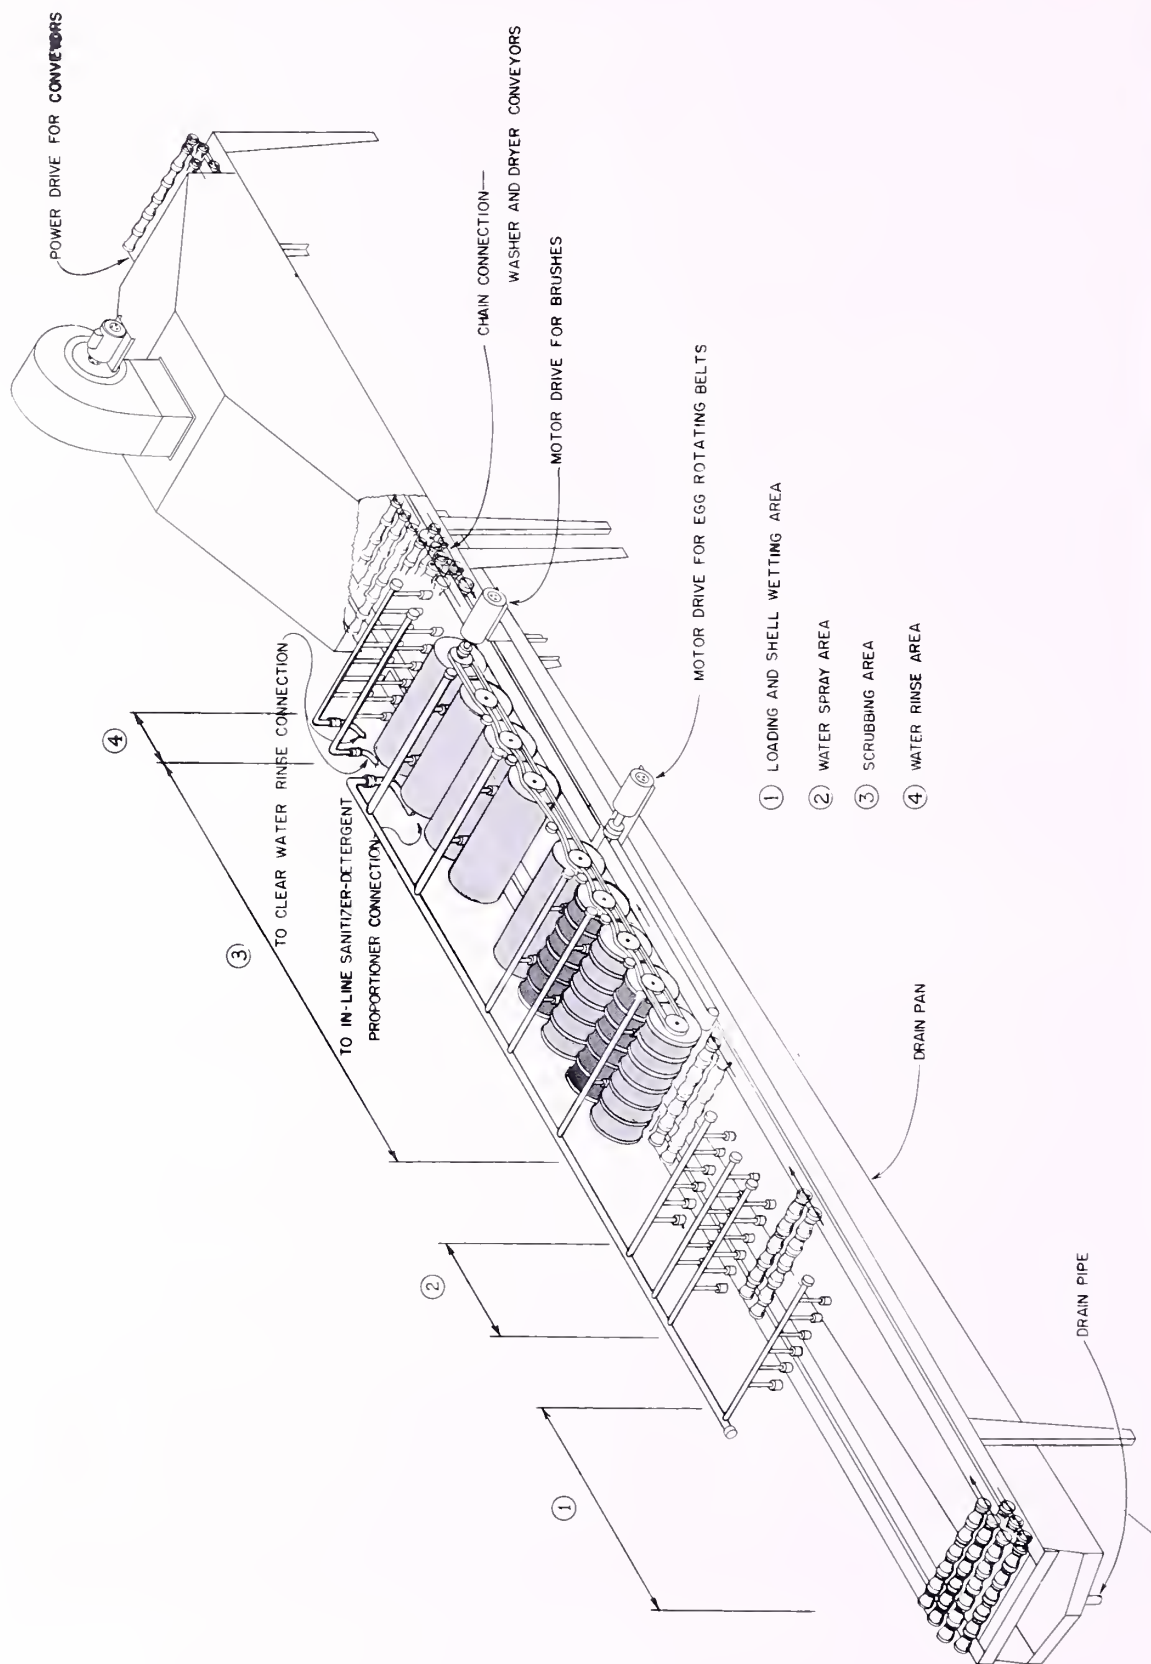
Schematic drawing (isometric) of the experimental egg cleaner.
